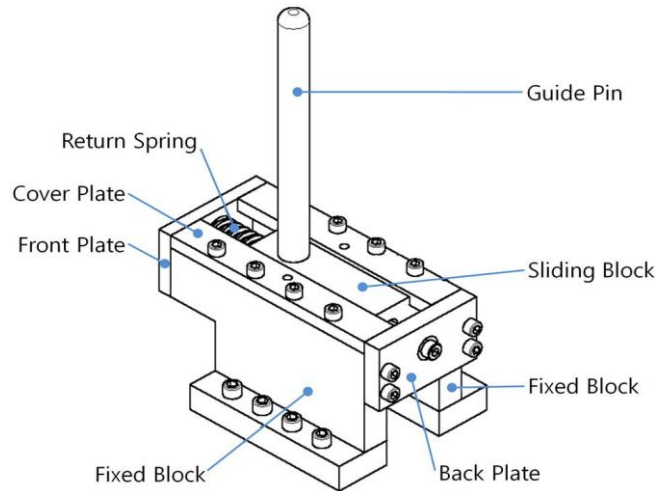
Geometric approach example for tool design of thick plate forming [3]
